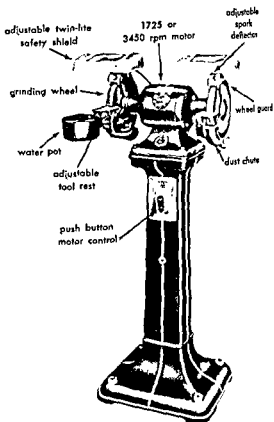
Power-driven wheels for hand grinding (Rockwell Mfg. Co.)
